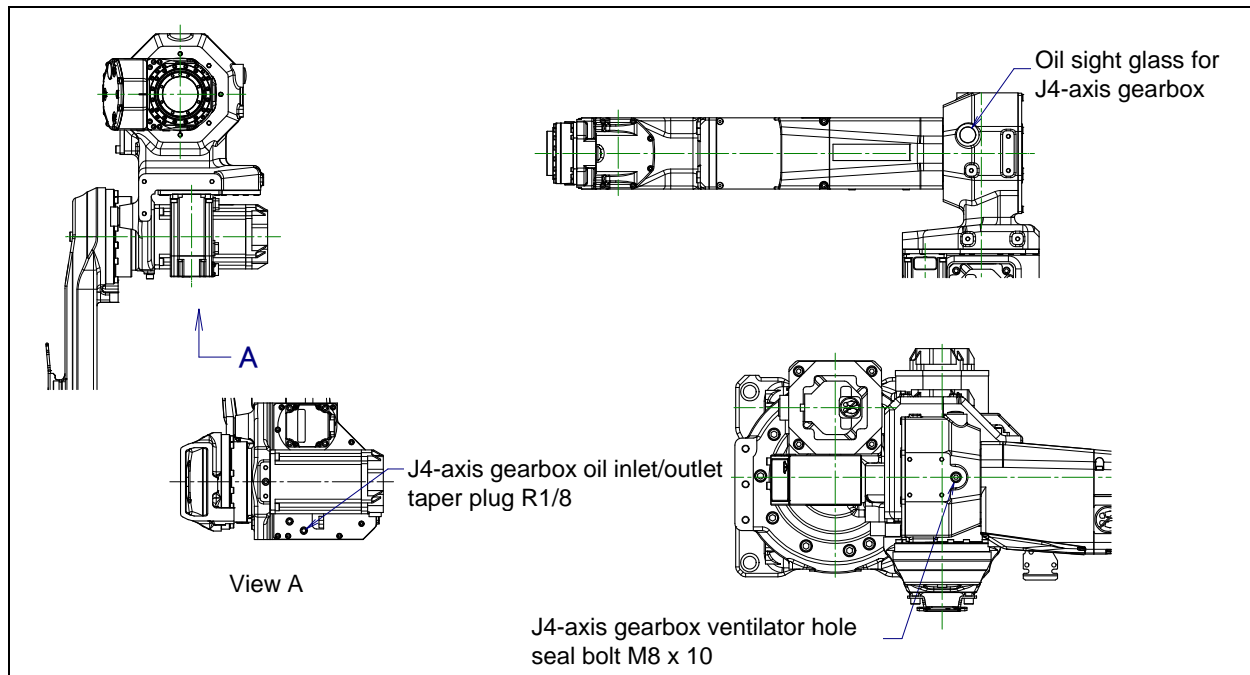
(b) Greasing point of J4-axis gearbox
